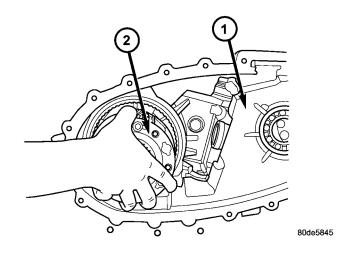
Remove Input Planetary Assembly 1 - FRONT CASE 2 - INPUT PLANETARY ASSEMBLY
